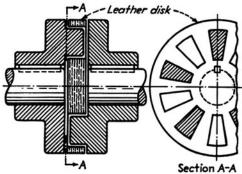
The principle of the T. B. Wood & Sons Company coupling is the same as Fig. 272, but the driving lugs are cast integrally with the metal flanges. The laminated leather disk is punched out to accommodate the metal driving lugs of each flange. This coupling has flexibility in all directions and does not require lubrication.
